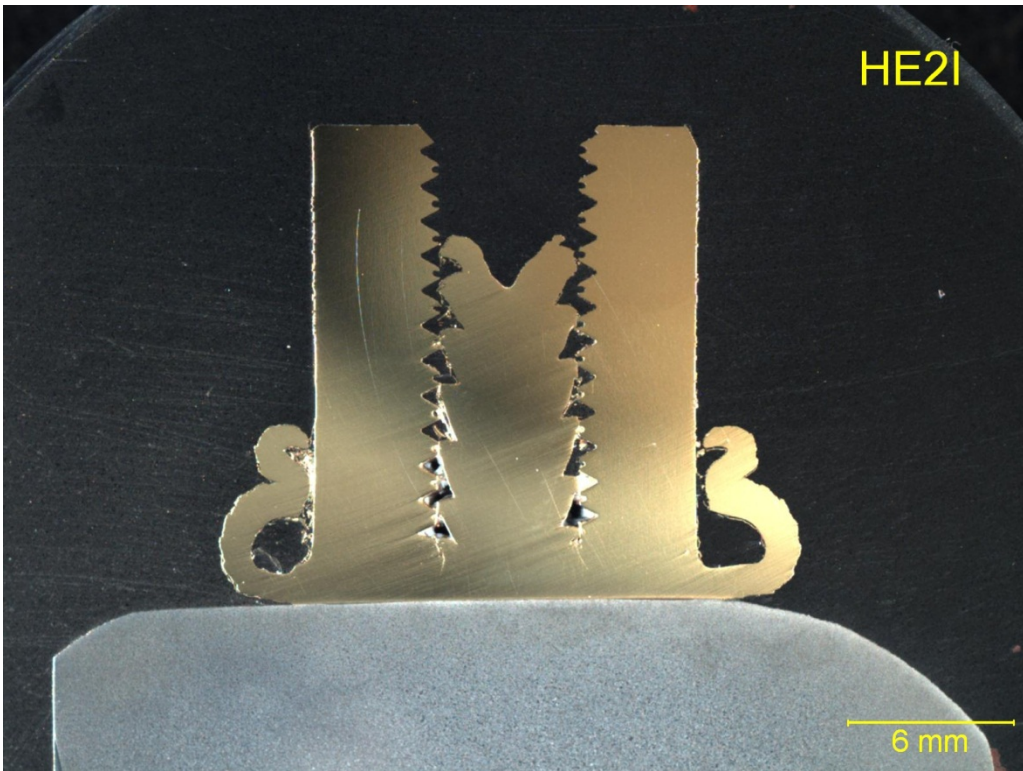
IFW Weld Joint Hyper-Eutectoid Rail #B
